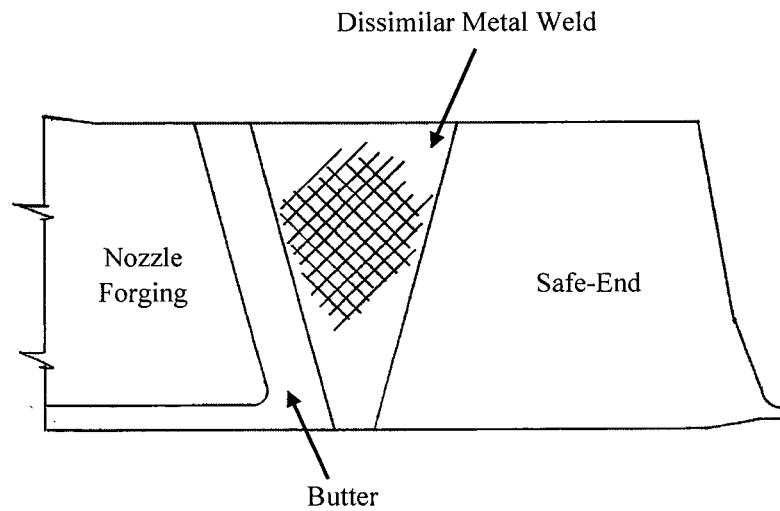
South Texas Unit 2 Reactor Vessel Inlet Nozzle DM Weld Configuration
